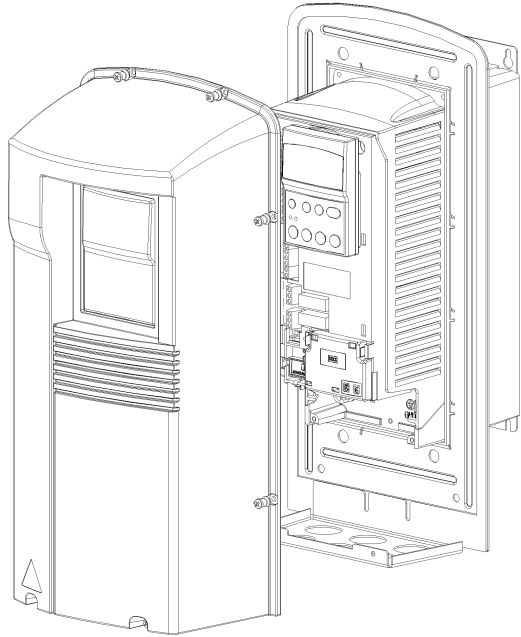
Opening type IP 54/NEMA Type 12 & 4 drives.
